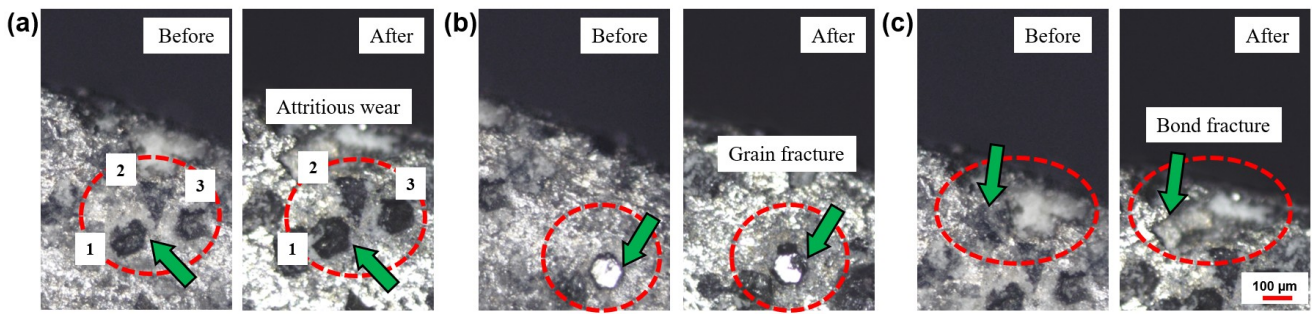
Wear modes observed on the cutting tool after machining with ultrasonic vibration assistance. (a) Attritious wear (blunting and polishing of abrasives); (b) Grain fracture (corner chipping of diamond abrasive); (c) Bond fracture (failure of the metallic bond).
